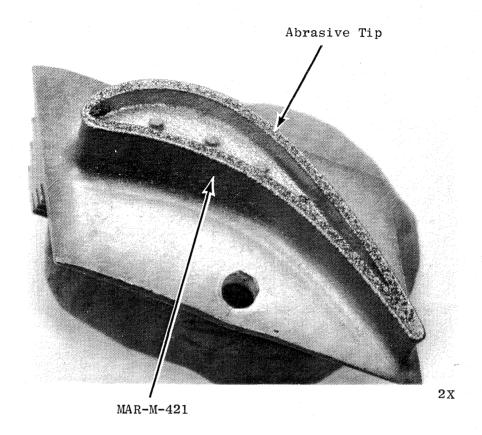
Wear-Test Specimen Machined to Simulate the CF6-50 Tip Configuration.
